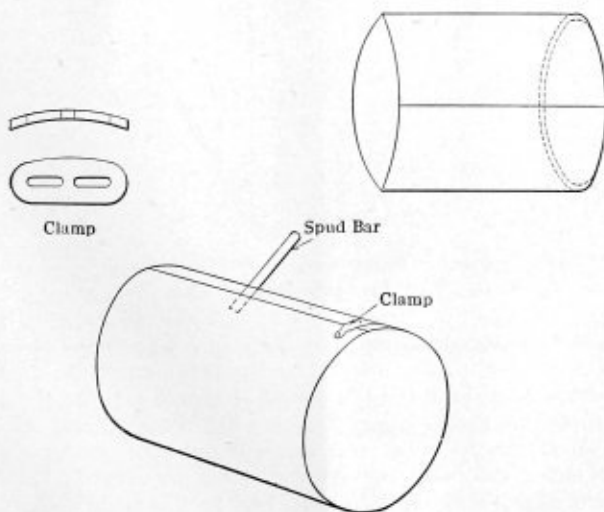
Showing Position of Cylinder and Heads for Welding
